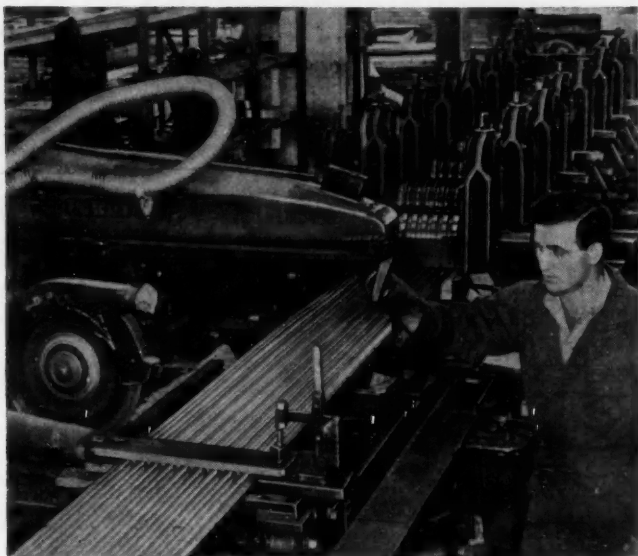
By a progressive forming process, strong, thin sections of stainless steel are rolled into stiff ribbed sections for trailer sidewalls and roof. Such work-hardening imparts high strength to the material
